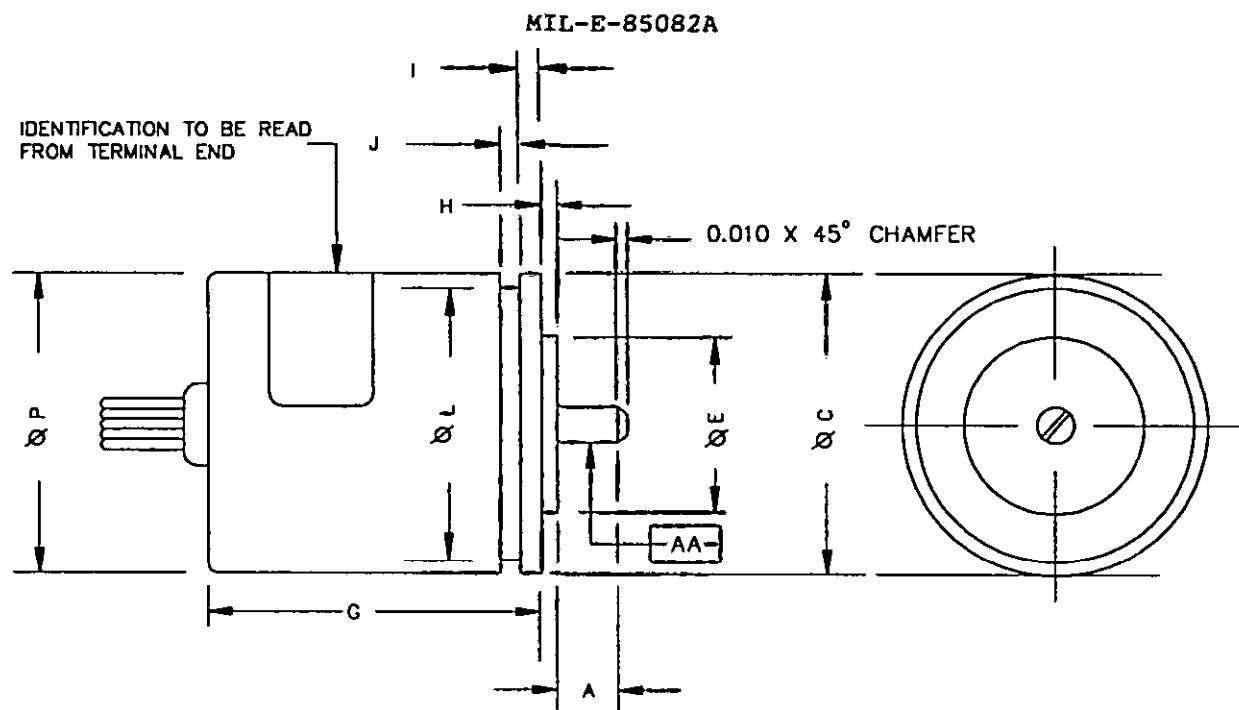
Outline drawing for size 23 shaft angle to digital encoders (synchro mount).
